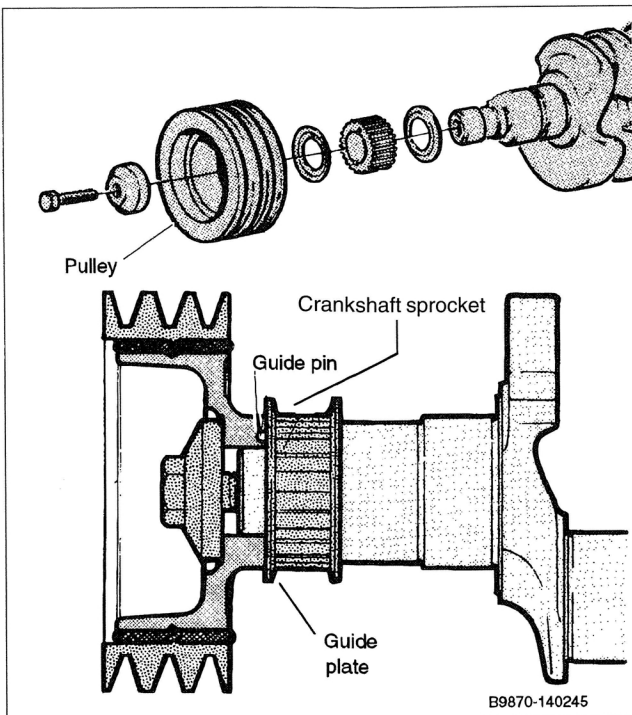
Proper installation of timing belt sprocket guide plates and crankshaft pulley.
